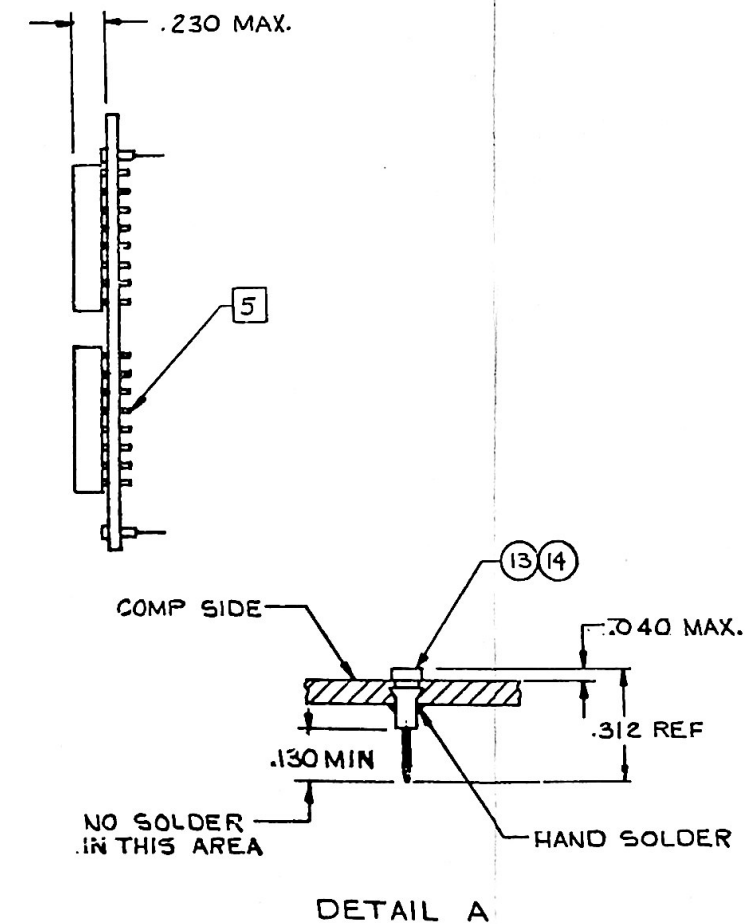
iSBC® 304 RAM Expansion MULTIMODULE™ Assembly Drawing
